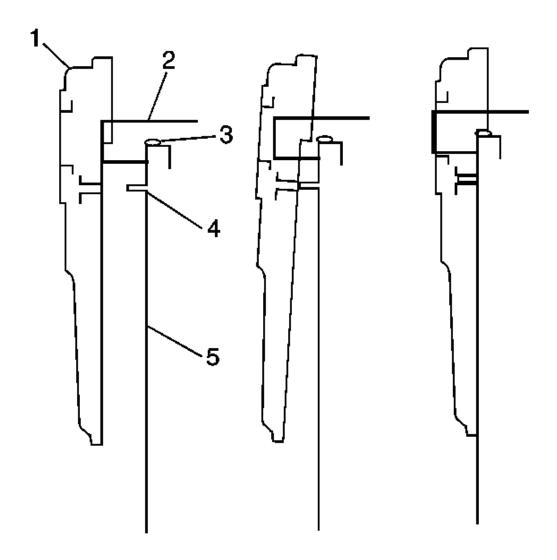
View Of Front Cover & Gasket Proper Installation Position Courtesy of GENERAL MOTORS CORP.
